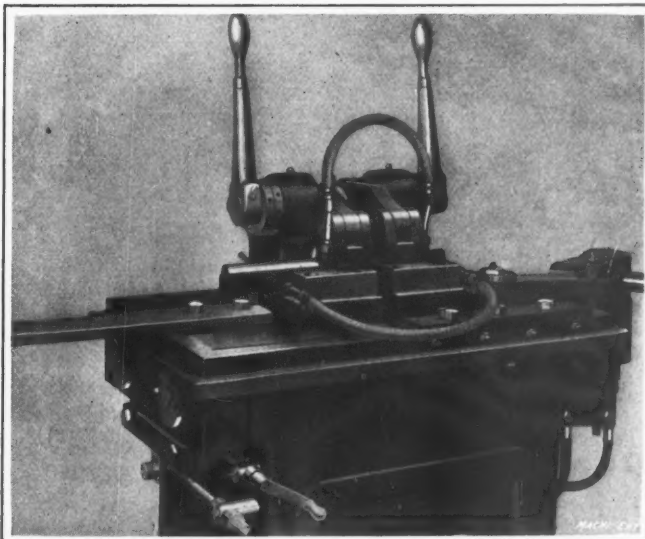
Close View of Mechanism of Detroit Electric Butt Welding Machine
